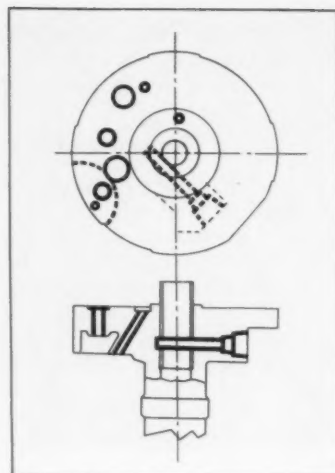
Simplified view showing in heavy line the operations performed on cast-iron distributor base by machine illustrated in Fig. 1
